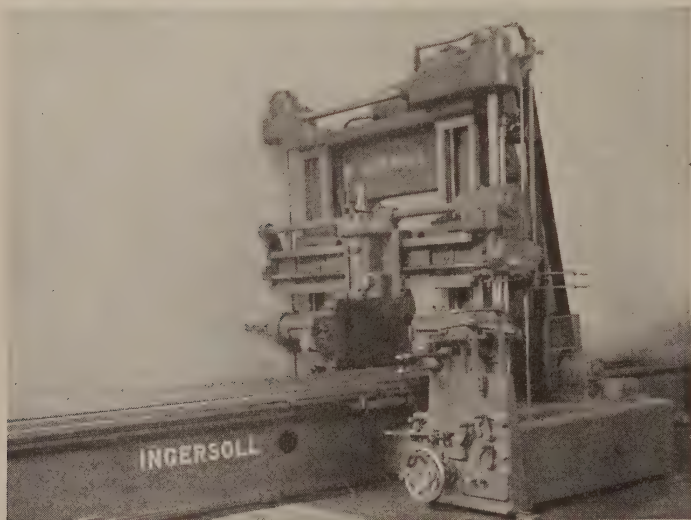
Planer-type milling machine. (Courtesy of The Ingersoll Milling Machine Company.)
